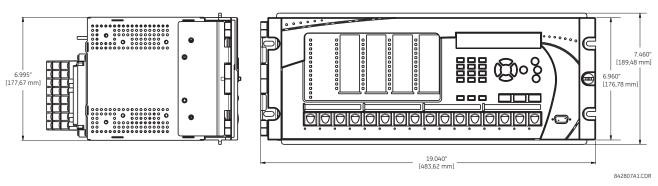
L60 HORIZONTAL DIMENSIONS (ENHANCED PANEL)
